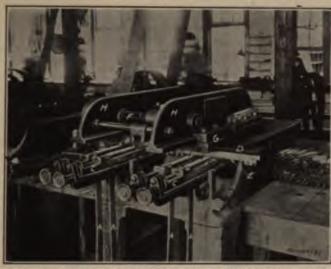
STRIPPING MACHINE FOR DRAW FILING THE BLANKS.
